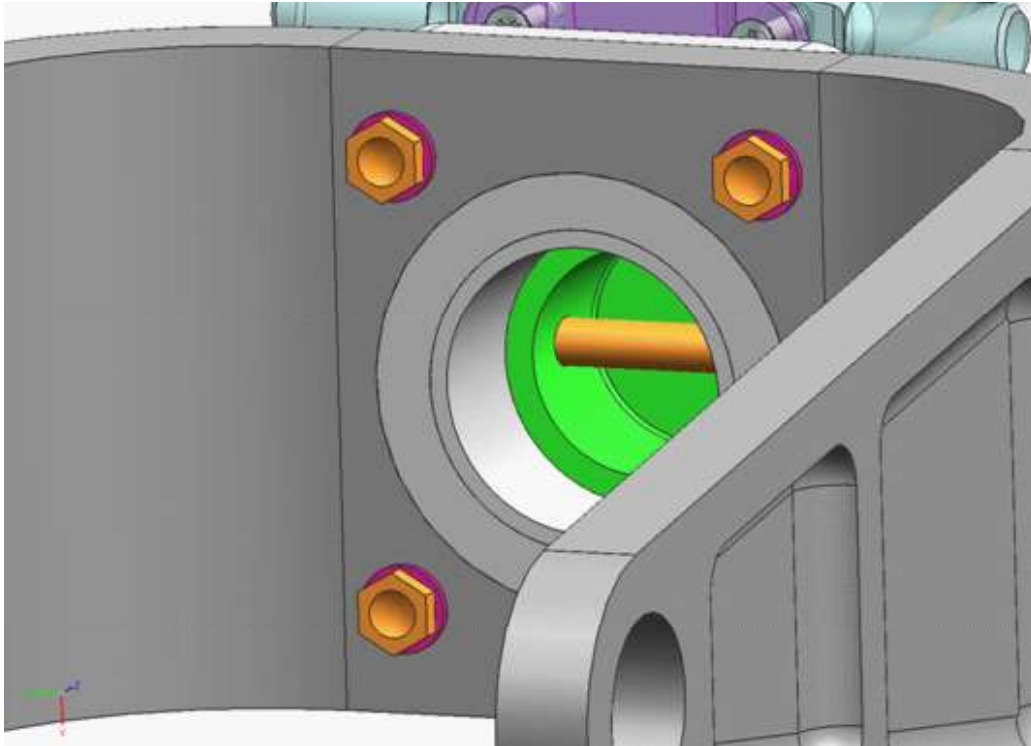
Capturing Bolt Installed through the Hole in the New Tube Cap
